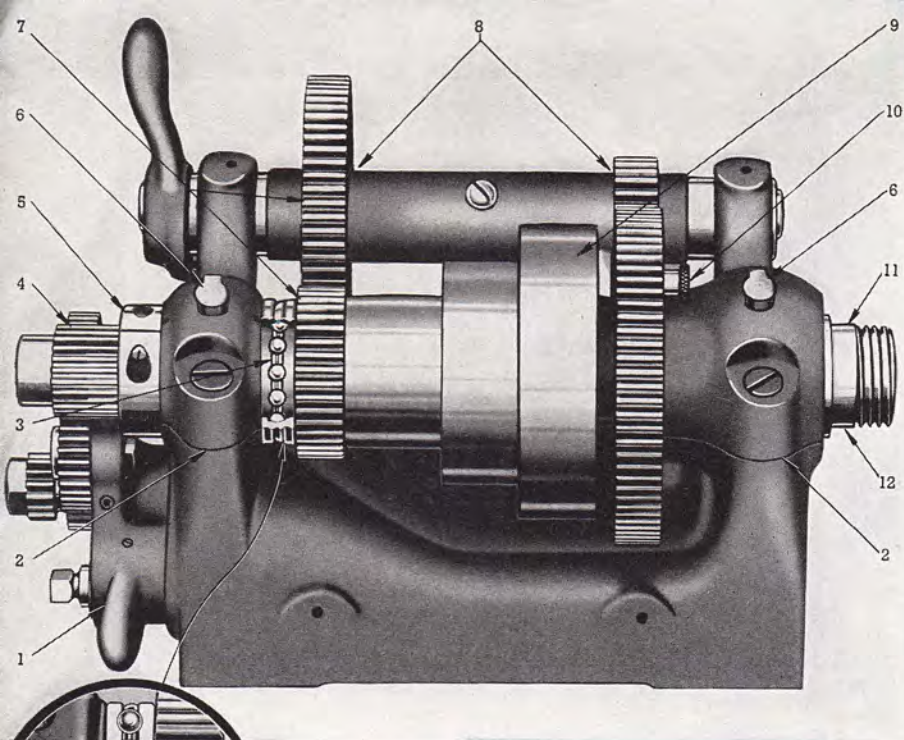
"Workshop" Lathe Headstock with Gear Guard Removed.
